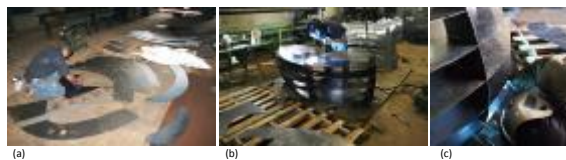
Assembling and welding process (photos by Wilson Barbosa).
